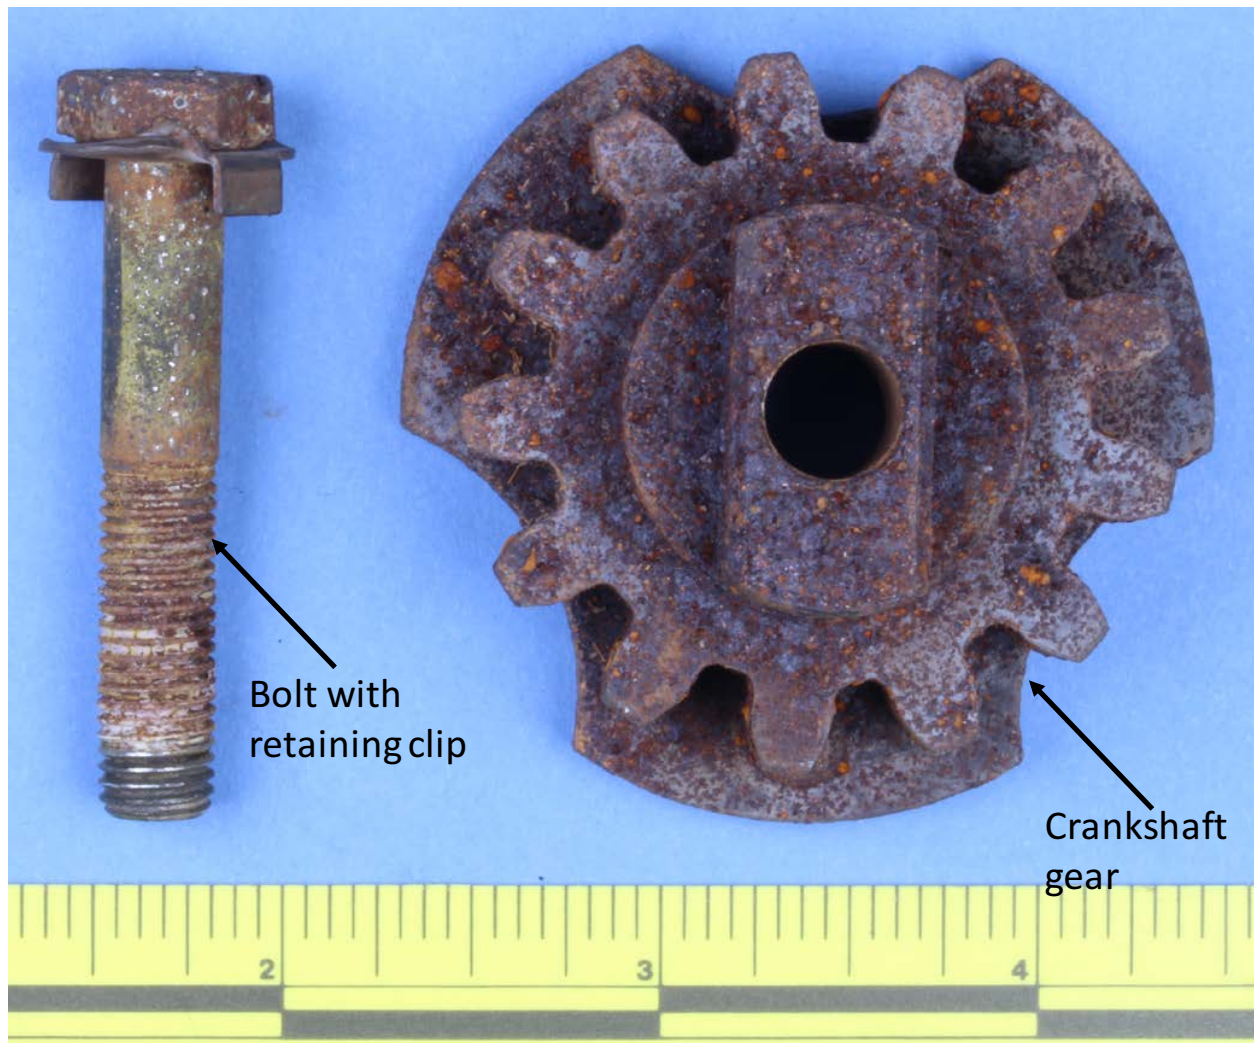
The as-received crankshaft gear with fractured dowel pin and associated mounting bolt/retaining clip.
